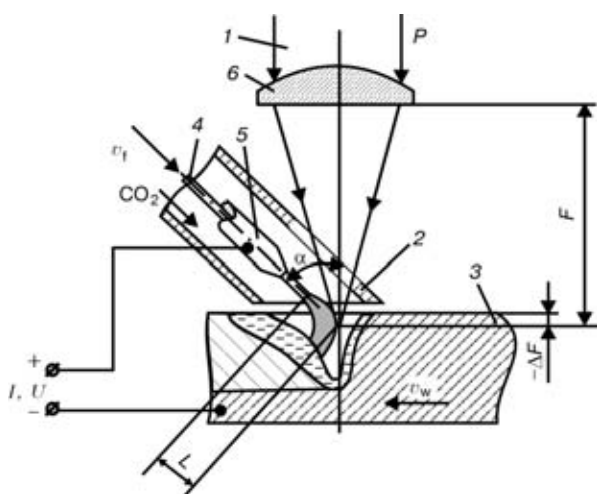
Schematic of conducting experiments on laser-arc hybrid welding: 1 — laser radiation of power P , kW; 2 — protective nozzle; 3 — sample; 4 — filler wire; 5 — copper current-conducting nozzle; 6 — focusing lens with focal distance F , mm; ΔF — focal point depth, mm; α — angle of inclination of the electrode to the laser beam axis, deg; L — arc length, mm
